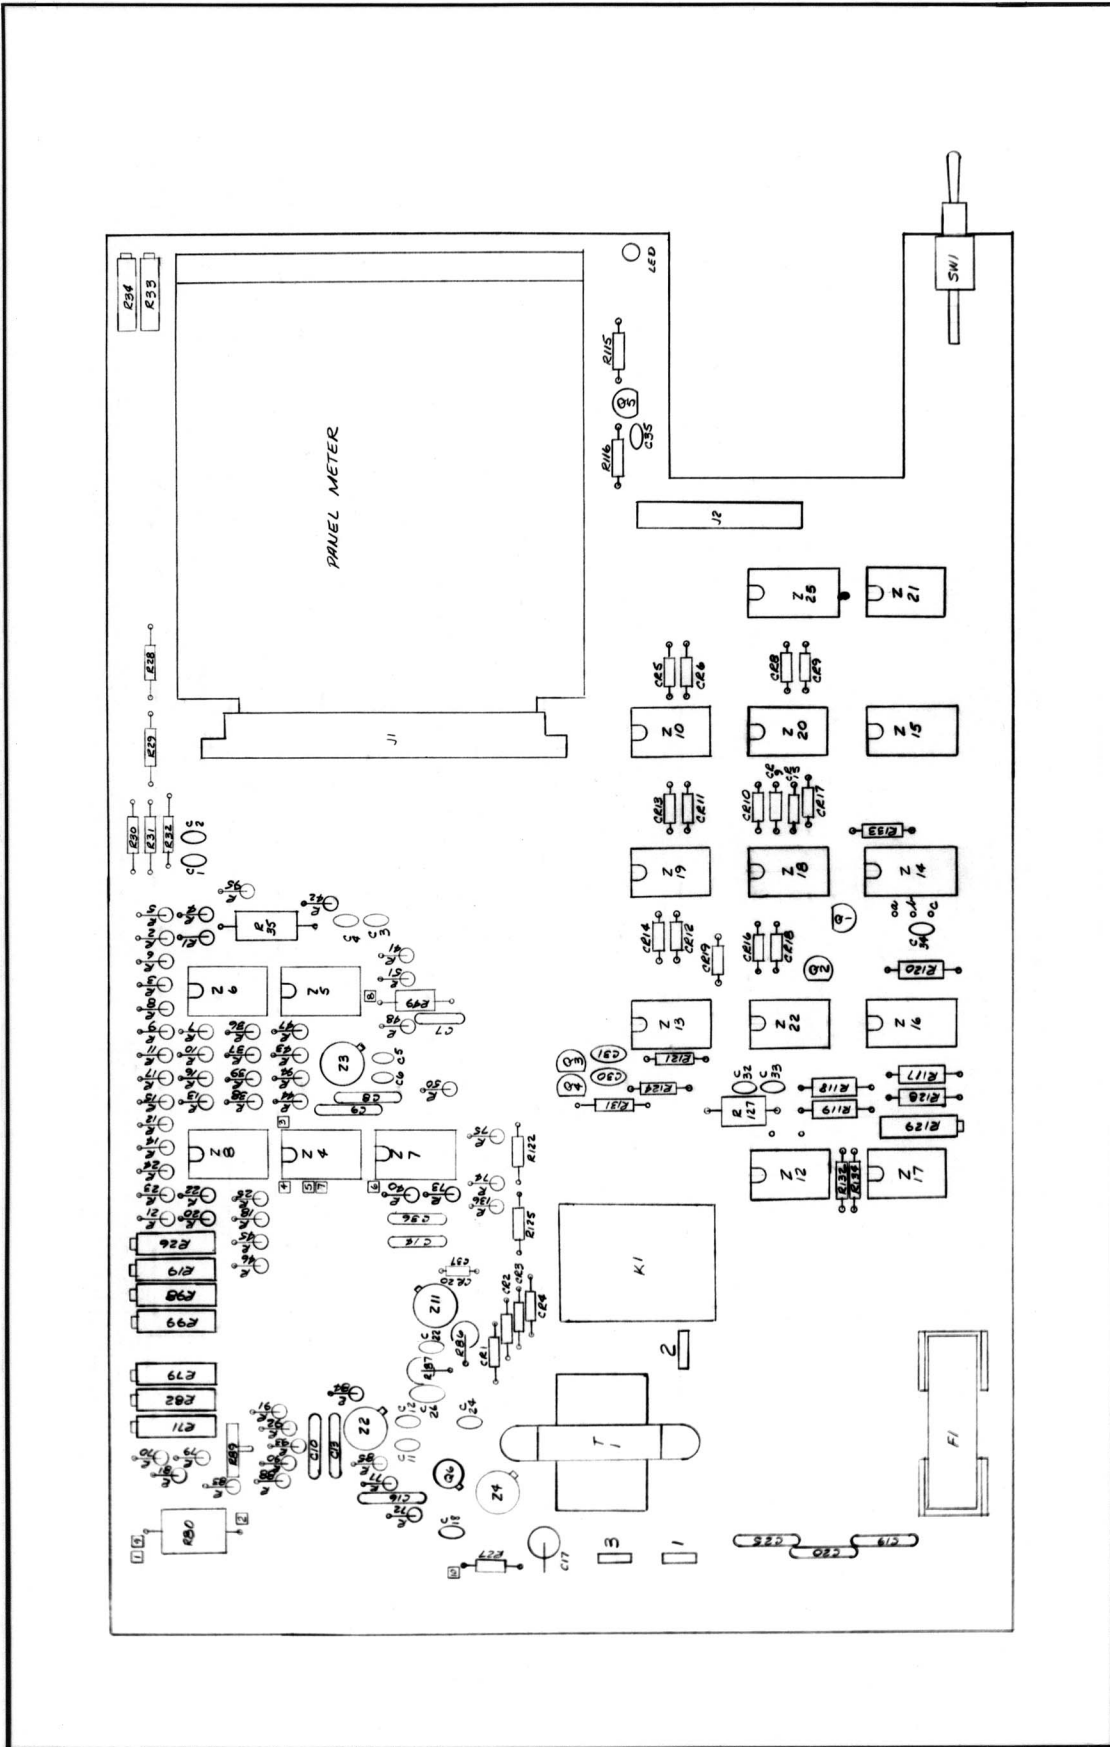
PRINTED CIRCUIT BOARD COMPONENTS LOCATOR
